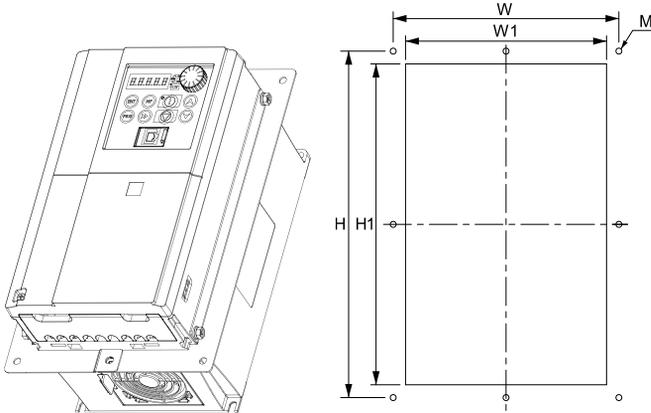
Frame A/B/C/D Central Mounting Dimensions
